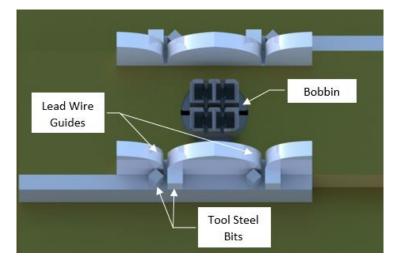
Fixture detail with bobbin holder in middle, wire guides direct wires to pinch and probe mechanism [18], [19], [20], [23].
